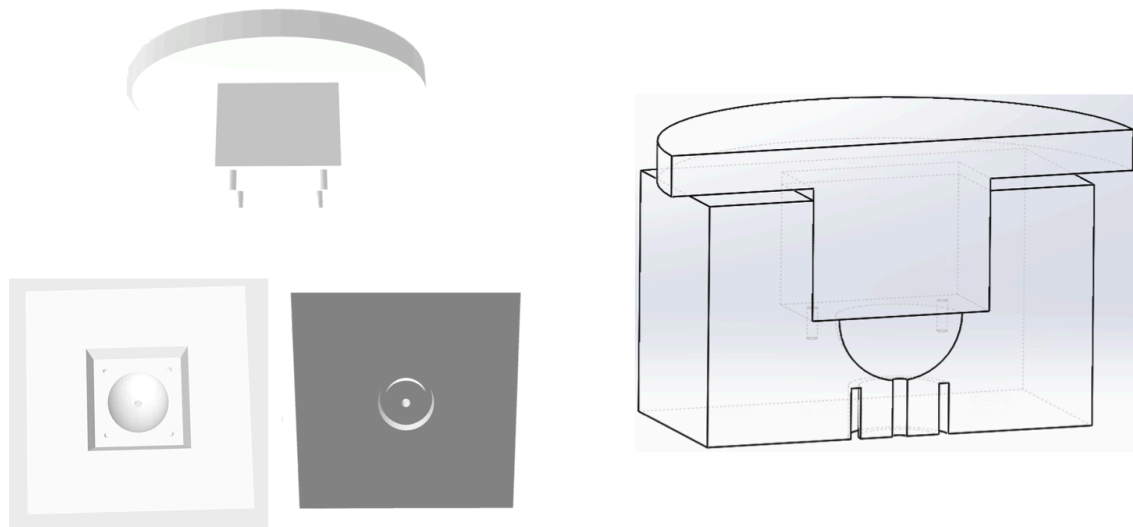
Solidworks Rendering of Vacuum Lens Fabrication Assembly (Left: by parts; Right: by Closed Assembly)
